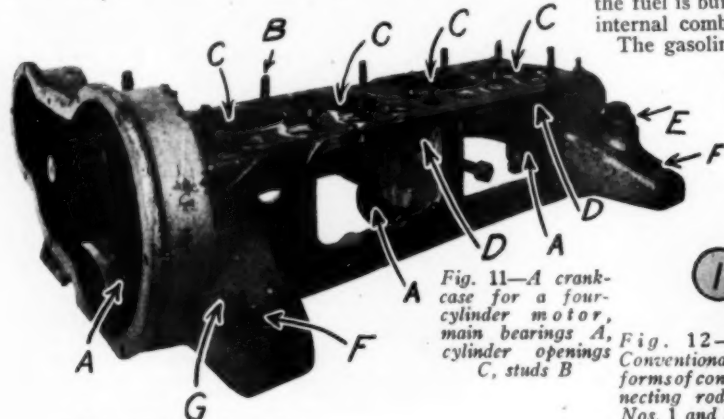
A crankcase for a four-cylinder motor, main bearings A, cylinder openings C, studs B
